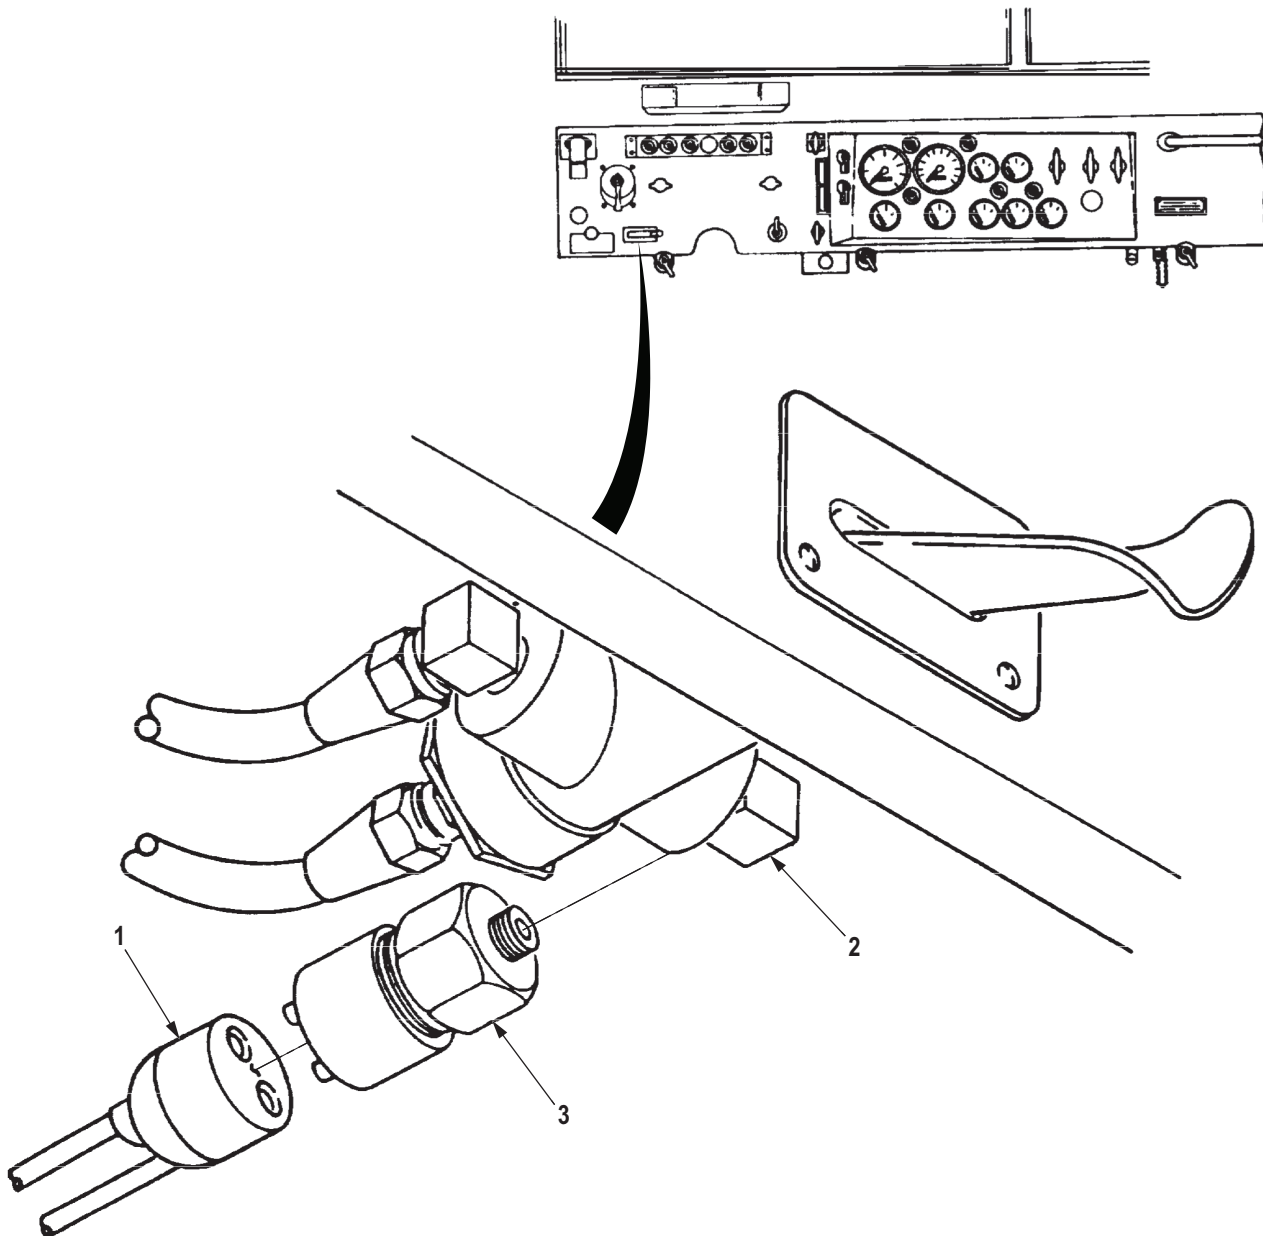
Front-Wheel Drive Lock-In Switch Removal.
